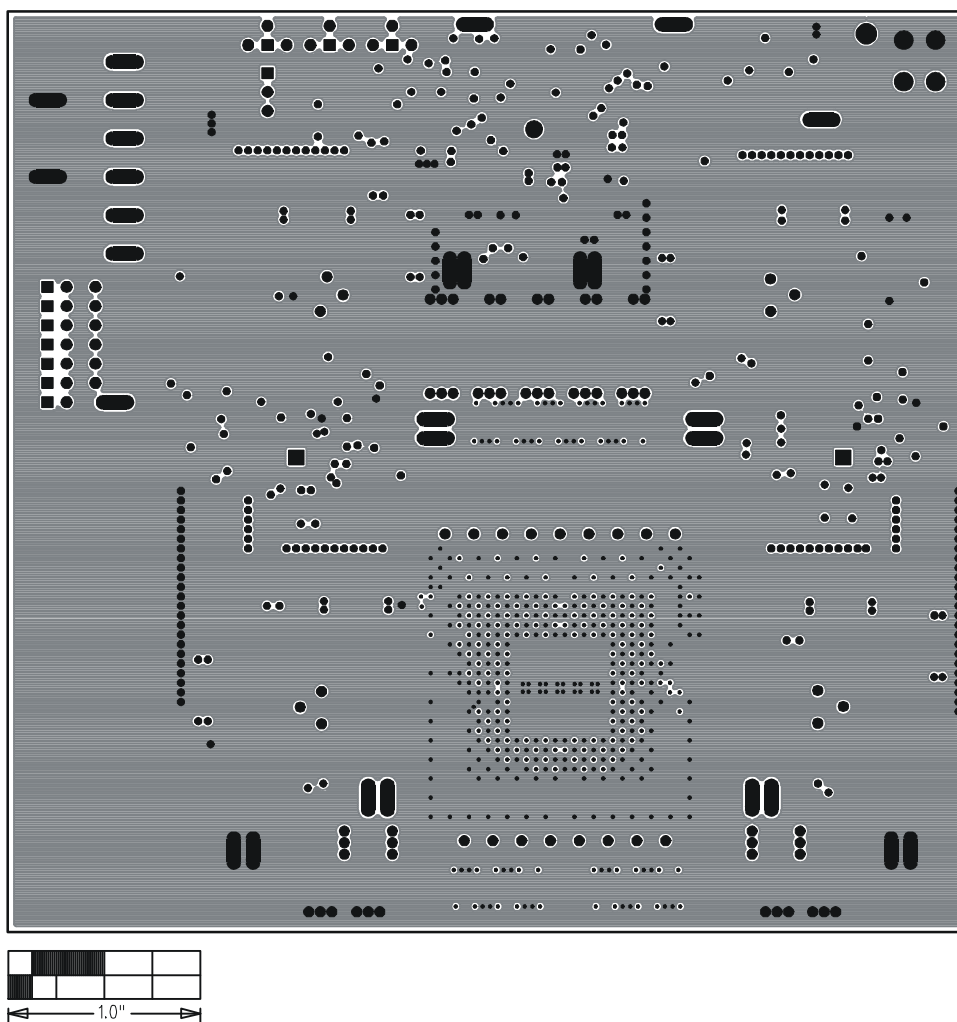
MAX1544/MAX1545 EV Kit PC Board Layout – Layer 7
